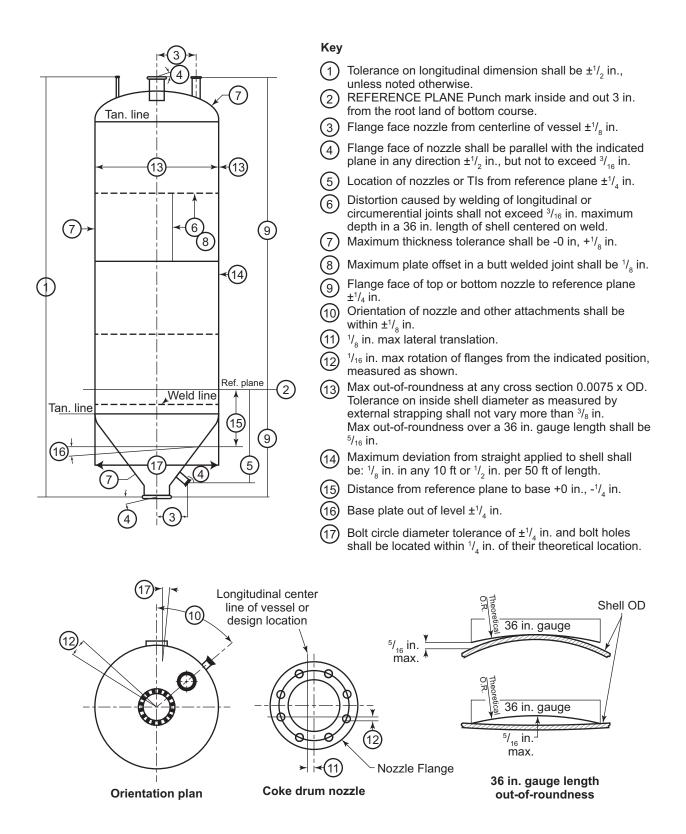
Typical Tolerances Specified for Drums in Coking Units
